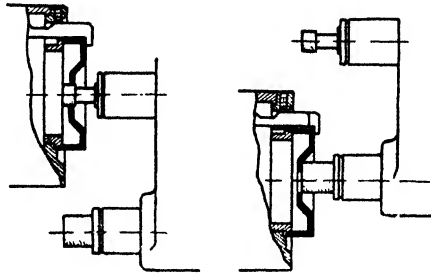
Another layout of a malleable casting which shows both spindle positions and type of chuck used.
